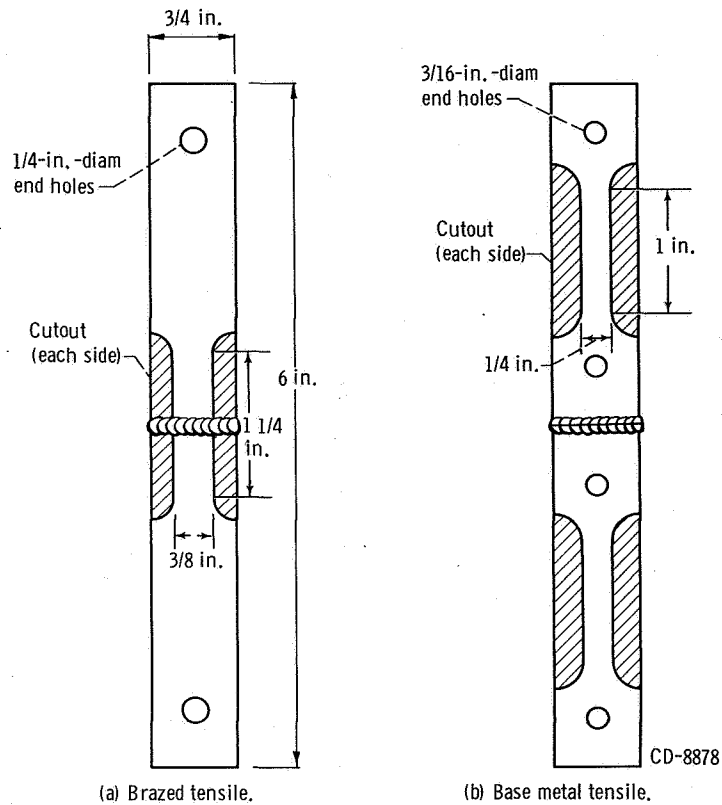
Tensile specimens in 0.020-inch brazed tungsten sheet.
